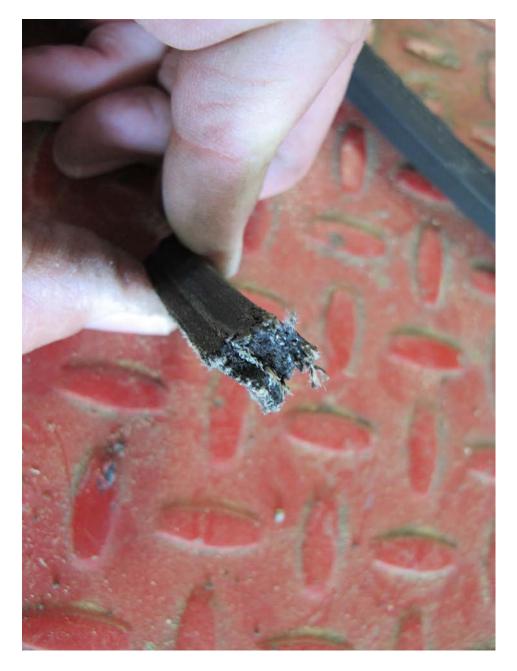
Fracture surface of small section of V-belt (RH Photo)
